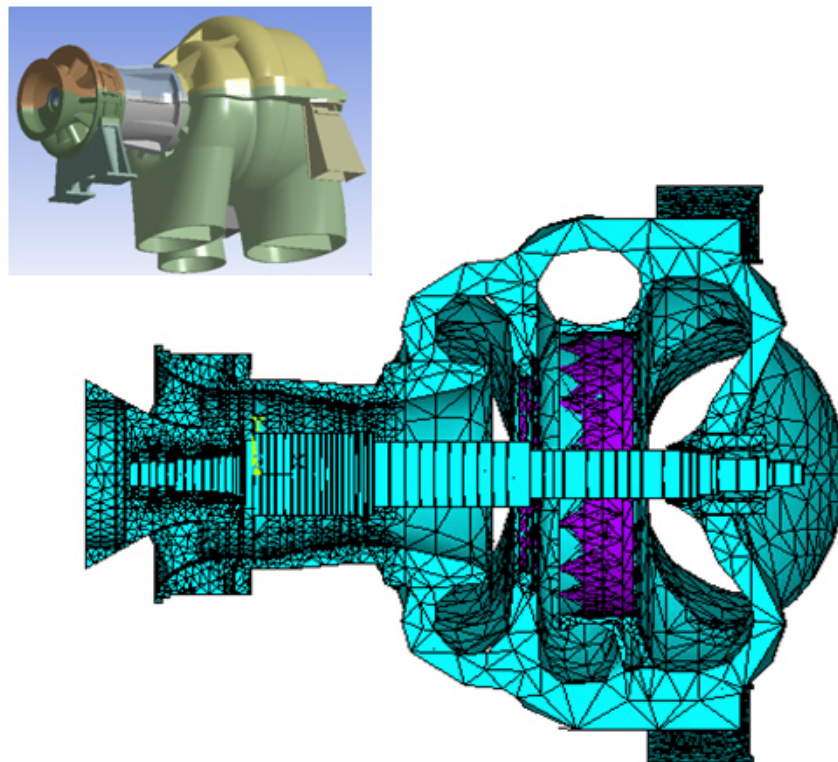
Sectional view of coupled rotor-casing. Inset view of entire model [18]
